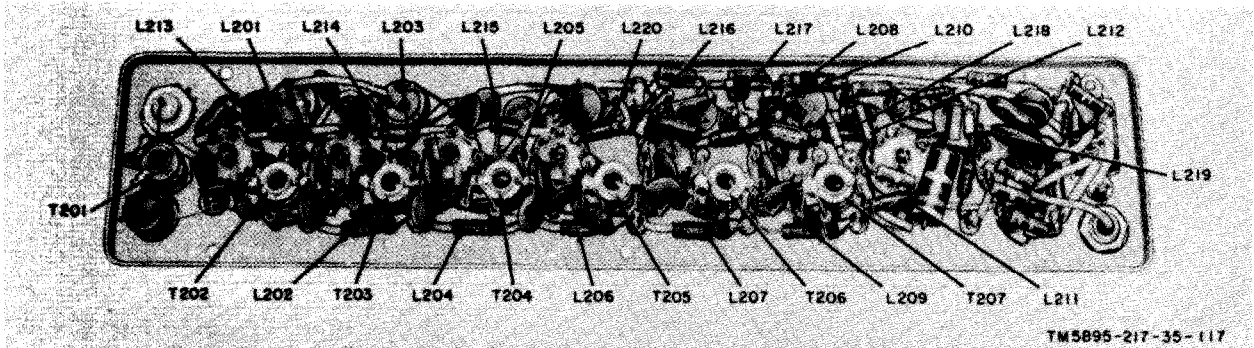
IF suppressor subchassis, bottom view, coil and transformer locations.
